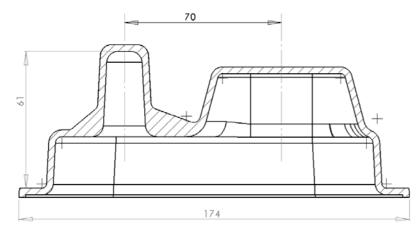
Dimensions in one die half and across the parting line. Dimensions 174 mm and 70 mm are between features in one die half. Dimension 61 mm crosses the parting line, because it is a dimension between the part outer and inner surfaces.
